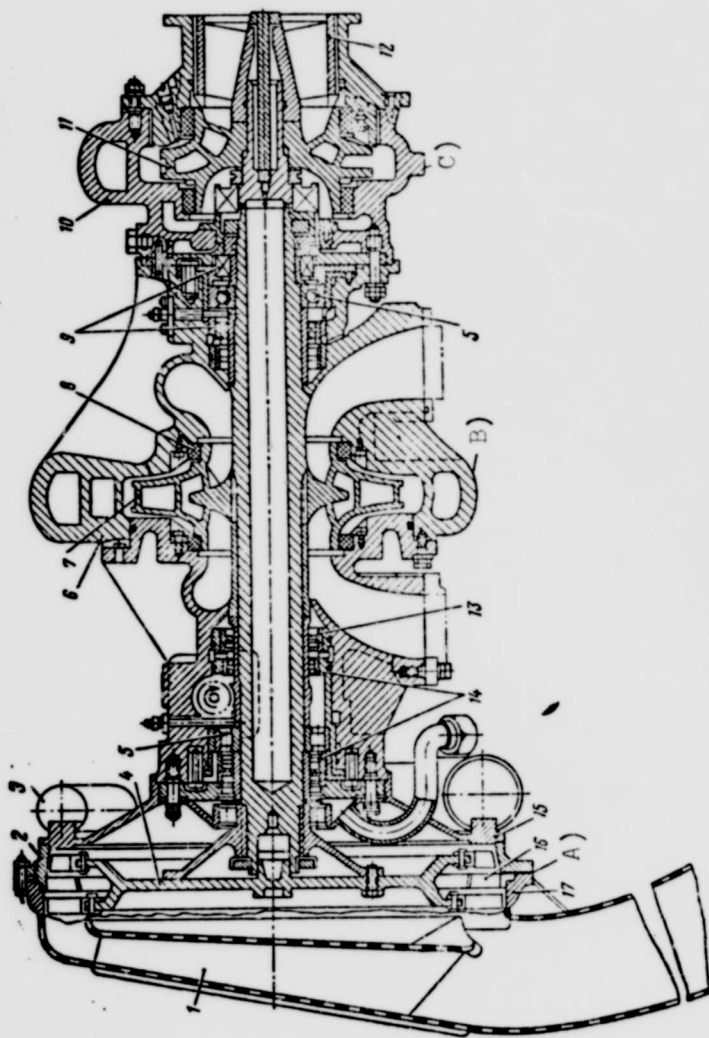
Turbopump assembly of a liquid propellant rocket engine:
